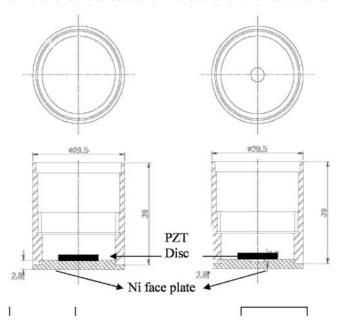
Drawing showing inner side of the face plate of the reference transducers and cross section of reference transducers with and without the circular defect at the center of the inner side of the face plate of ultrasonic transducer.
